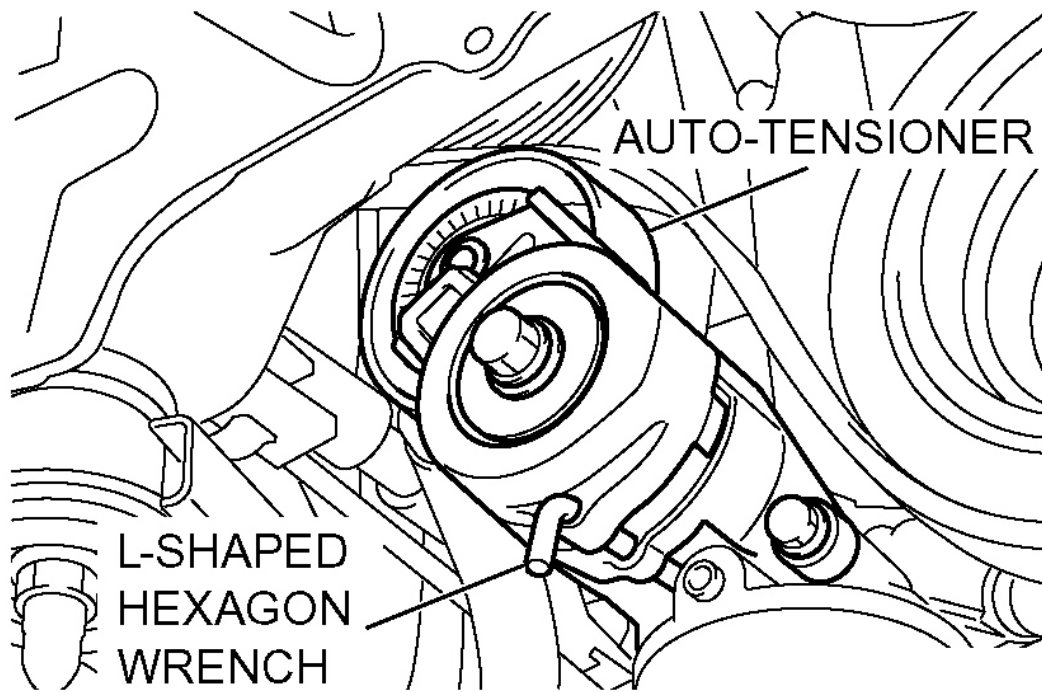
Rotating Auto-Tensioner Counterclockwise And Align Hole A With Hole B
